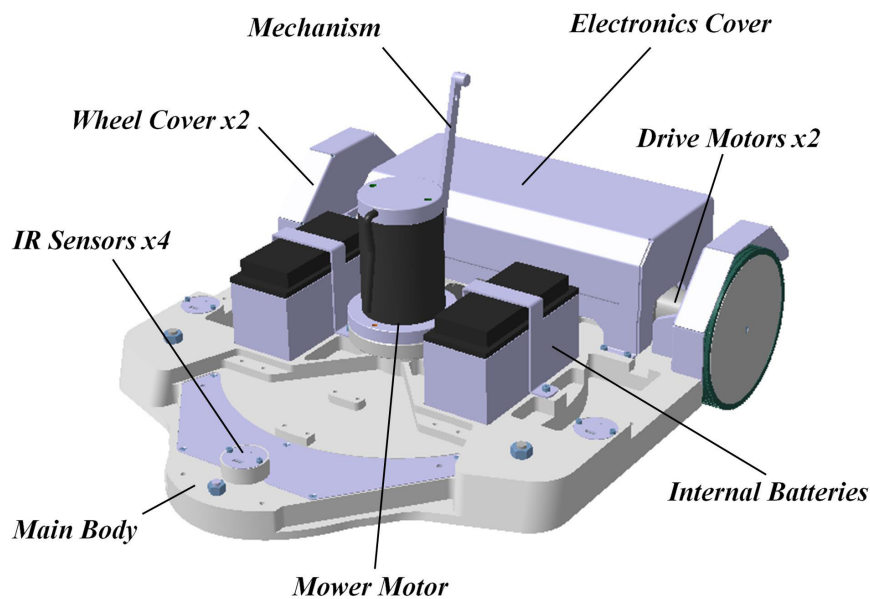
Internal Layout of Autonomous Lawn Mower
